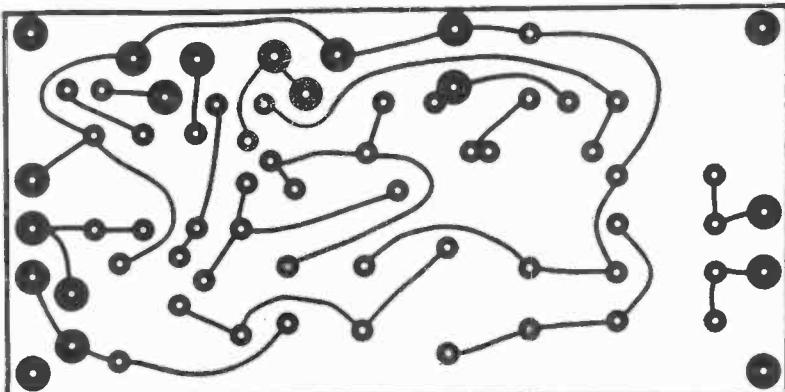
Actual-size foil pattern can be used to make your own circuit board.
